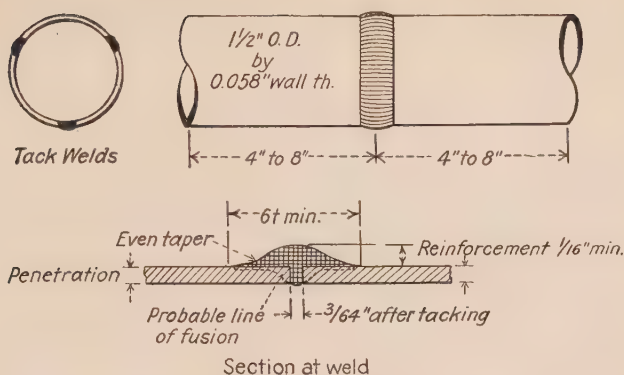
Open butt-weld test. Rotate tube while welding. Reinforcement $\frac{1}{16}$ to $\frac{1}{8}$ in. Width of weld to be eight times weld thickness.
